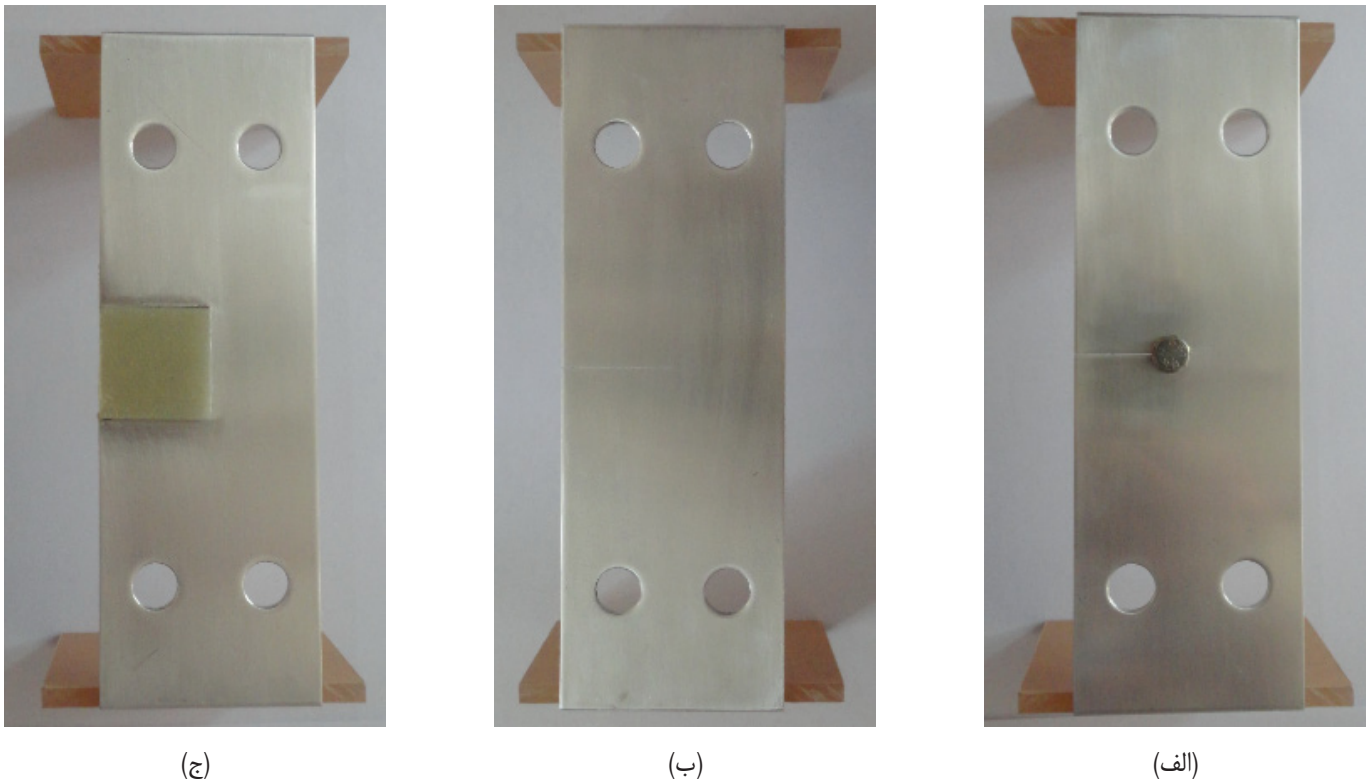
Experimental test specimens and its dimensions (mm). a) Composite patched, b) Bolt clamped
